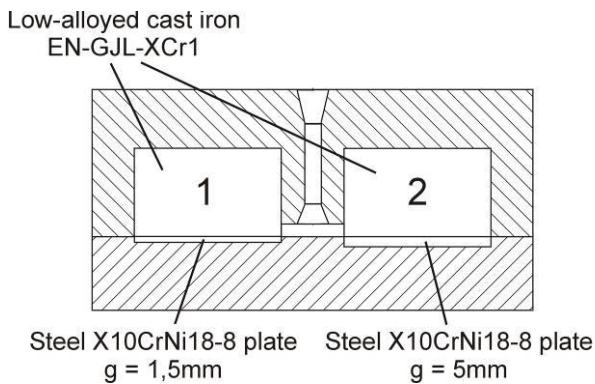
Section of sand mould ready to pour liquid metal and obtain a test bimetallic casting
